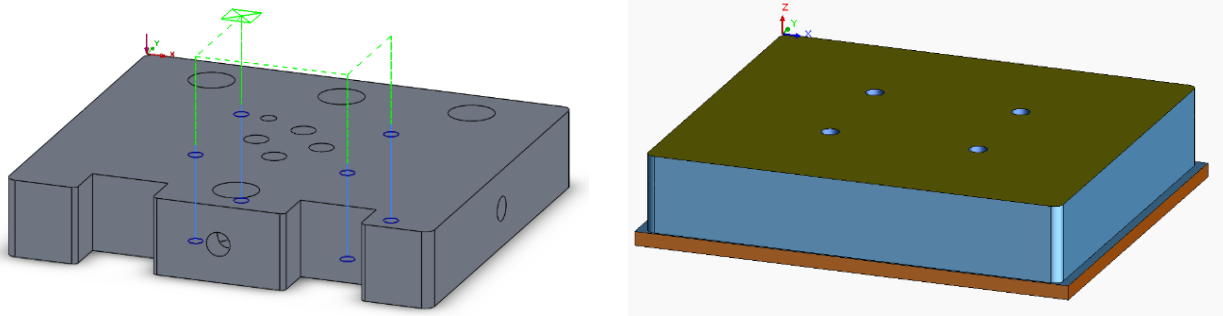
Drilling 10-24 holes (a) tool path (b) machined result
